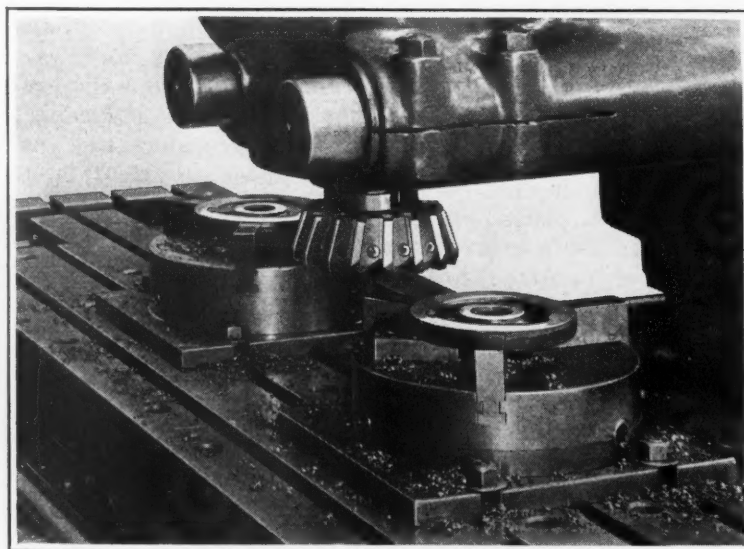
Milling Forged-steel Gear Blanks with Tantalum-carbide Cutters
